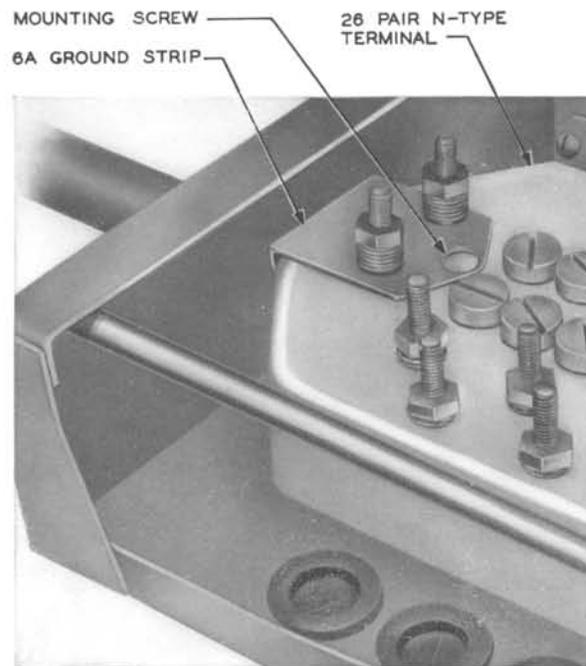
METHOD OF INSTALLING 6A GROUND STRIP
